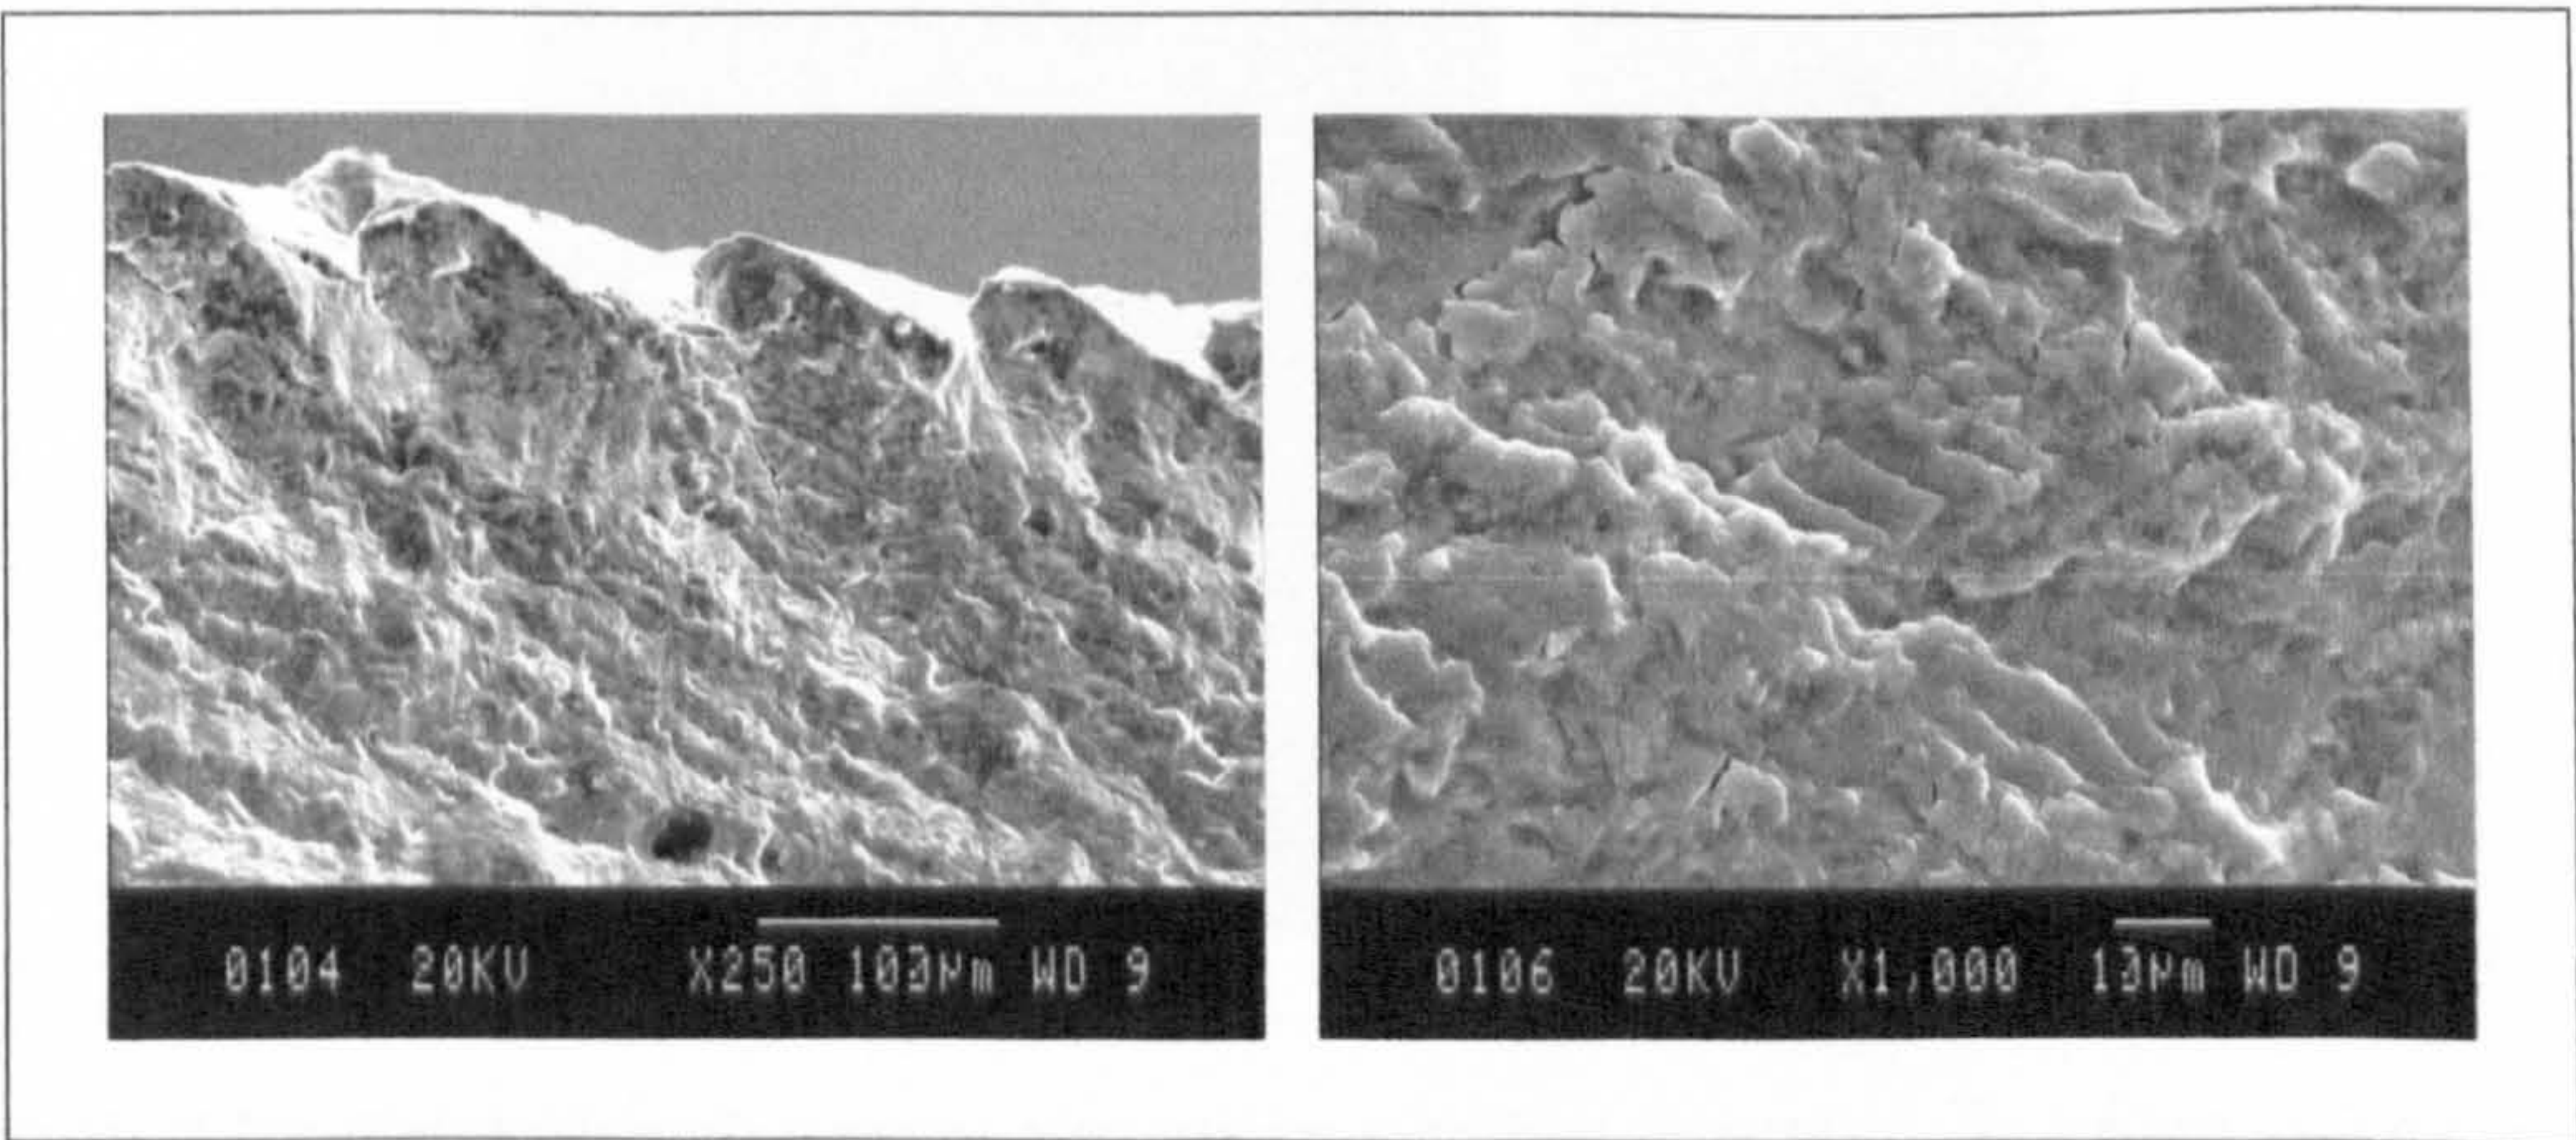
Crack initiation sites due to score marks from tool shoulder (left), fatigue crack surface with secondary cracking evident (right), (FS SP 6).
